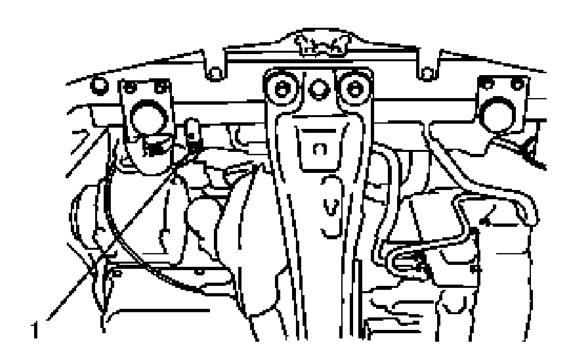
Locating Radiator Drain Plug Courtesy of SUZUKI OF AMERICA CORP.
